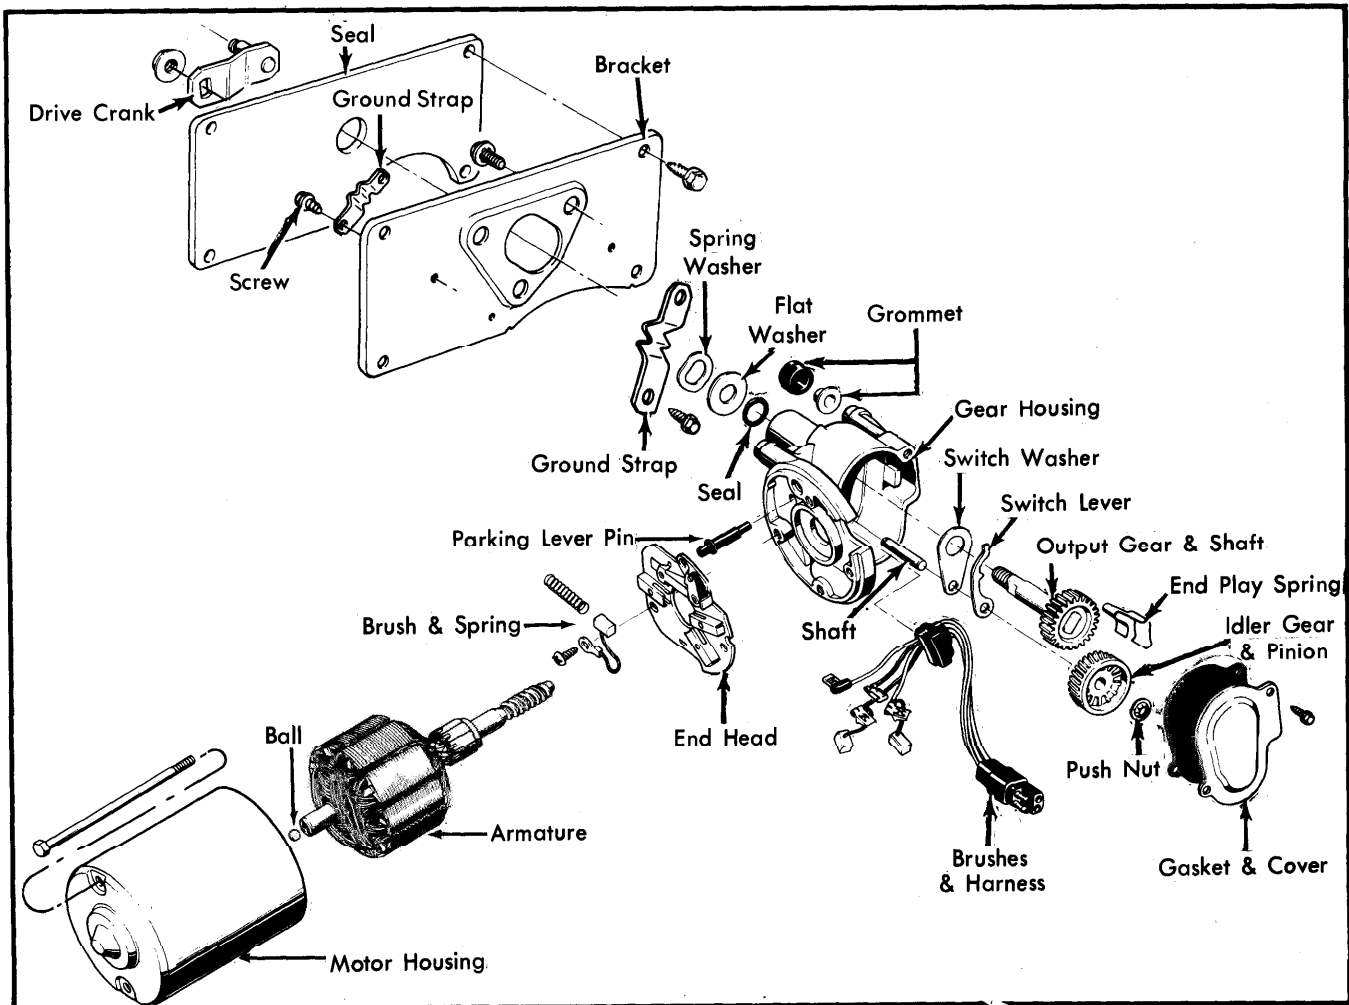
Exploded View of AMC Wiper Motor & Transmission
